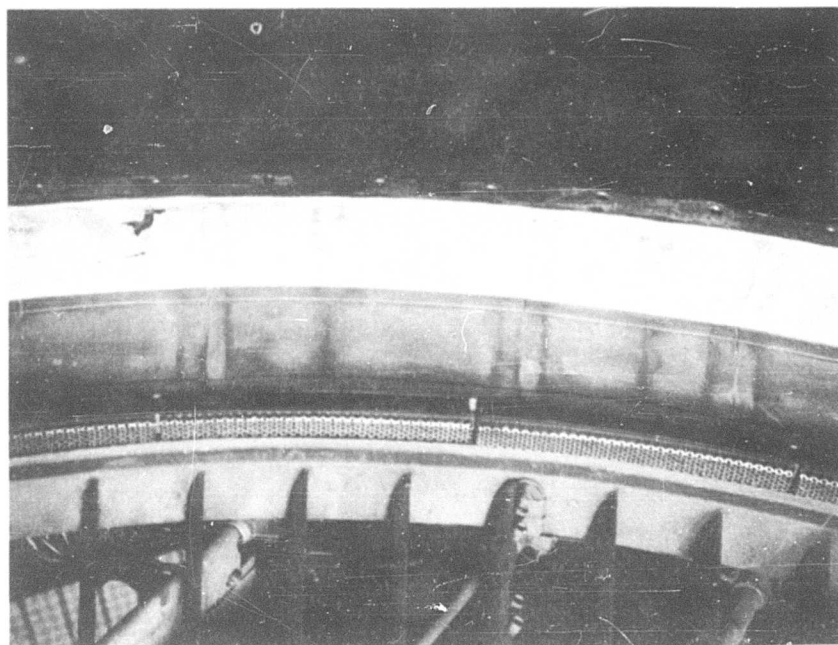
TURBINE RUB, REAR FRAME INSULATION BLANKET (FAN 002)
